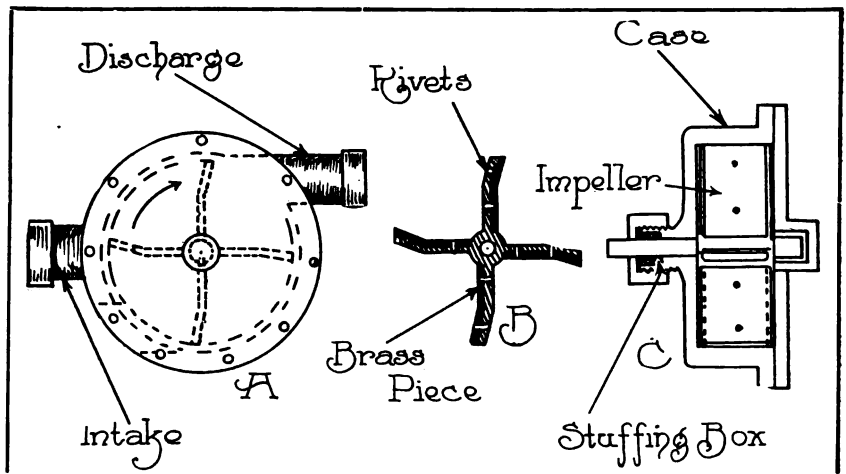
A, Constructional Details of the Water Pump Under Discussion; B, How Propeller Blades Should Be Repaired; C, Shows How Blades Should Fit.
